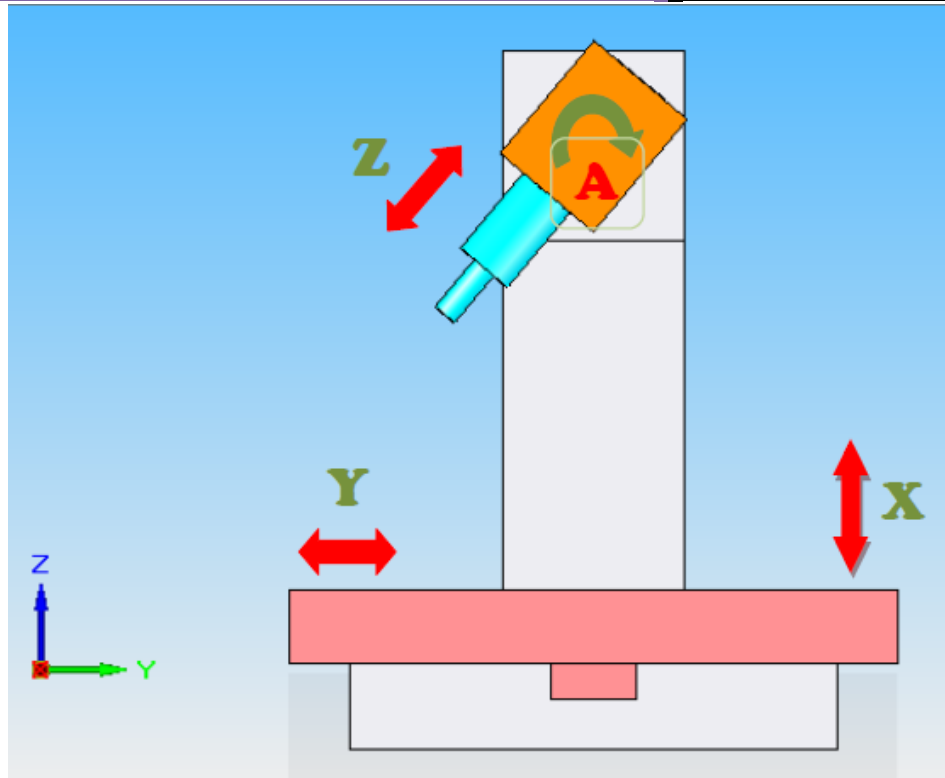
(b): Front View of Machine head Rotate in 5-axis milling Machine.
